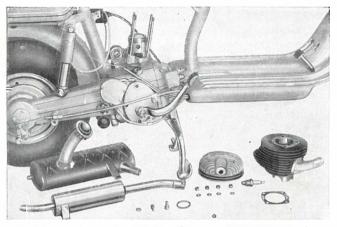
To remove the cylinder, silencer and expansion chamber.
